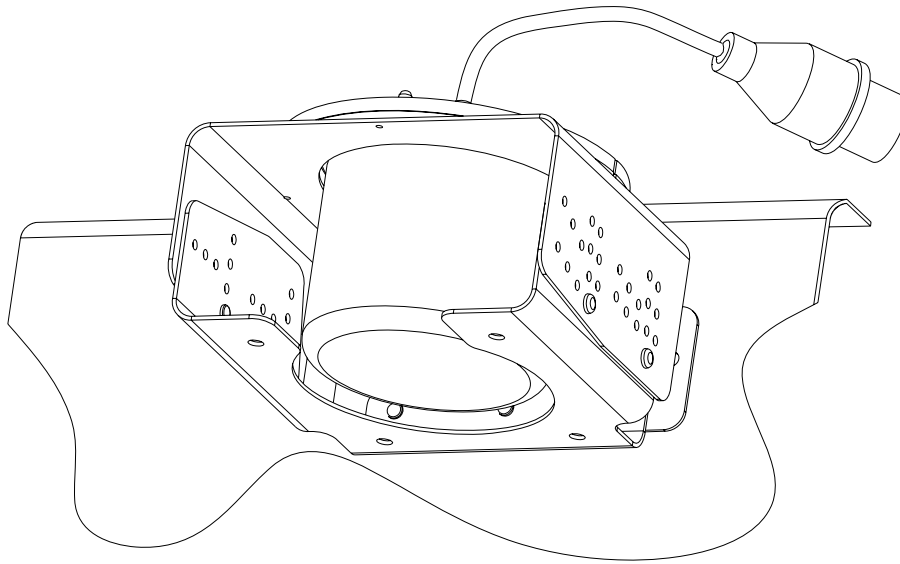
GMU 44 Universal Mount, Side Plate Mounted
